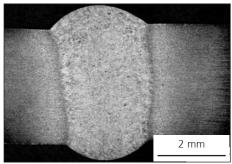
Deep welding with filler, Cr-Ni-steel, 3mm-sheet, feed rate 120m/min
